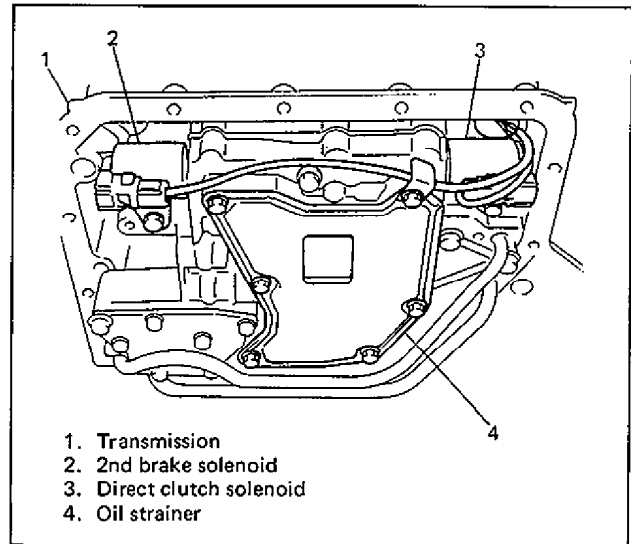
B-43 Direct Clutch and 2nd Brake Solenoid
